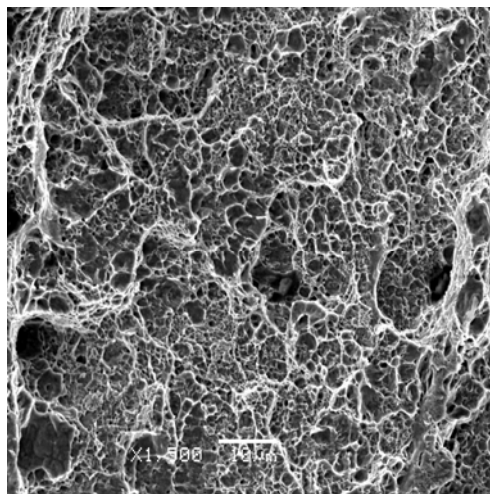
Microfractography of a laser welded joint, fracture in the base metal, 1500x times magnified
